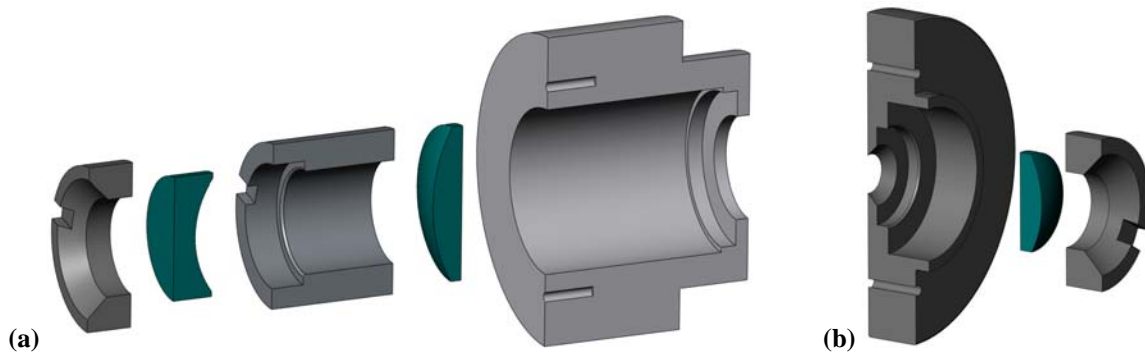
Exploded views of the mounts for lenses 1 & 2 (a) and lens 5 (b) in prototype 2.0.
